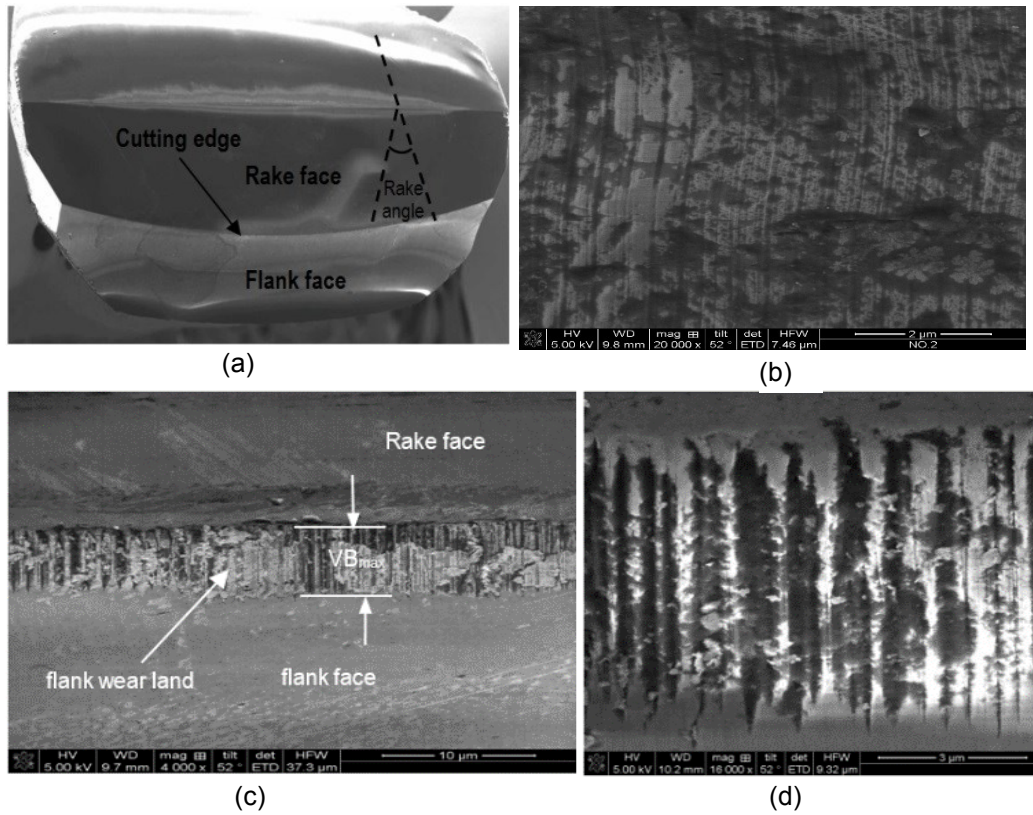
SEM images of diamond tool (a) new tool (b) flank wear (after cutting distance of 5 km) (c) Final tool wear when brittle fracture appeared on silicon surface (d) zoomed image of (c) shows groove and abrasive wear mechanism
